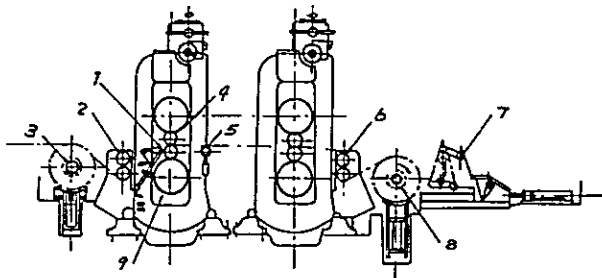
shows a single stand 4-high skin pass mill and Fig. 8 a 2-stand 4-high skin pass mill.
